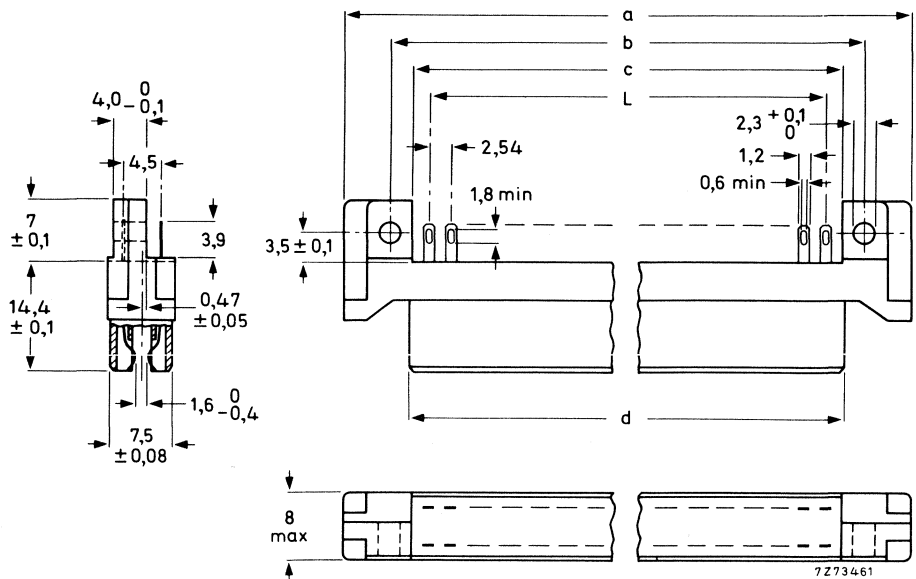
Board part with solder tags. See Table 1 for dimensions a, b, c, d and L.
